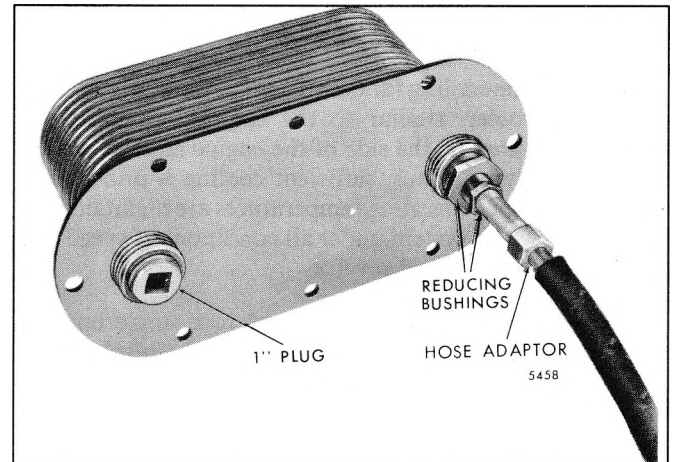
Oil Cooler Element Prepared for Pressure Test
